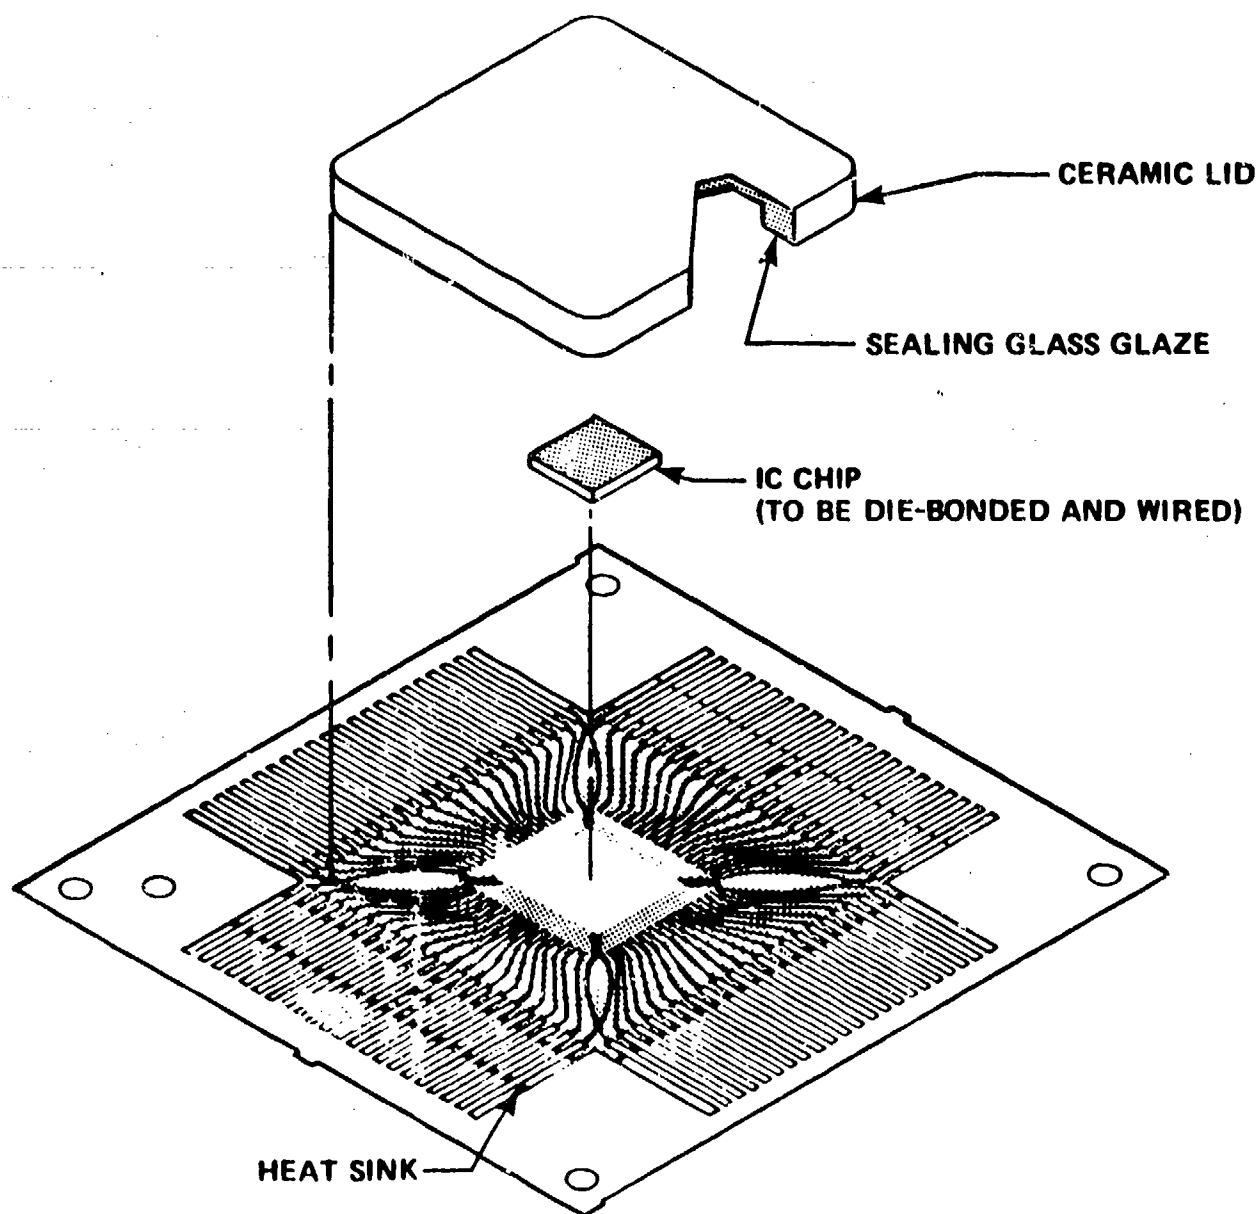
DB Cu HCC Assembly and Hermetic Glass Seal
